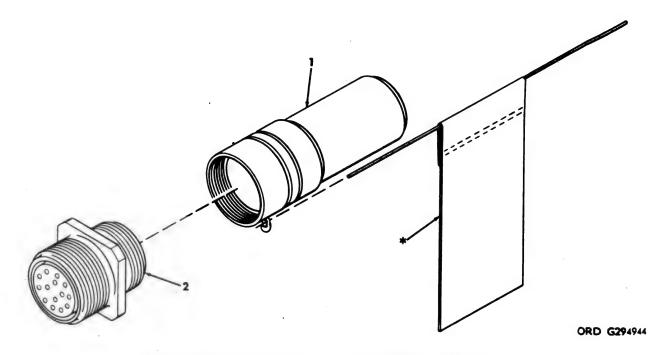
FITTING ASSEMBLY, BOOSTER THRUST /902R004/ /SFE FIGURE 144 FOR NEXT HIGHER ASSEMBLY/
